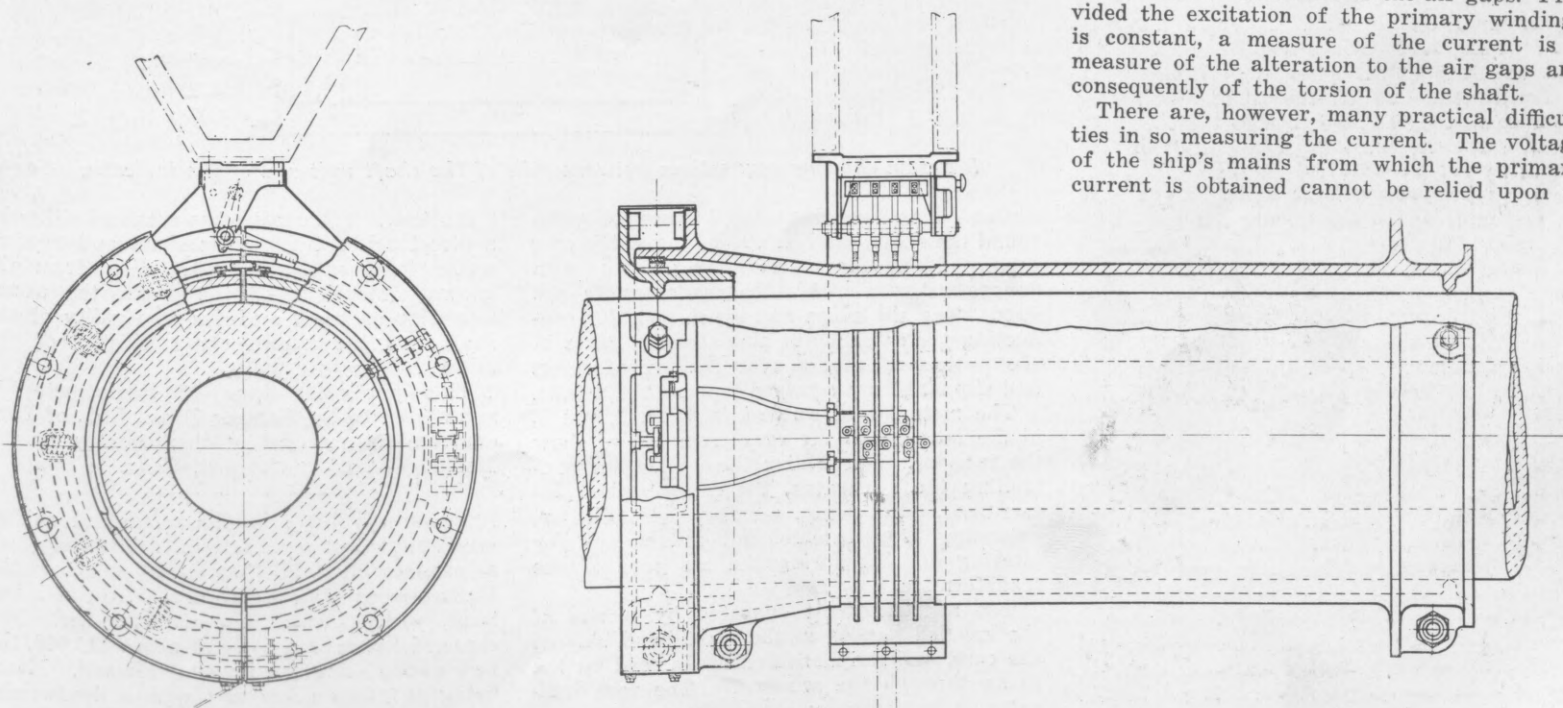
End view and side elevation (both in part section) of a commercial torsionmeter for measuring power transmitted to the propeller
